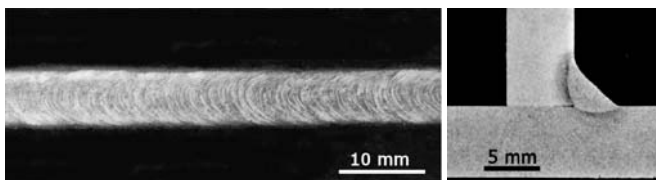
Bead appearance and cross sectional macrostructure of New ZERODE-44 in horizontal fillet welding
